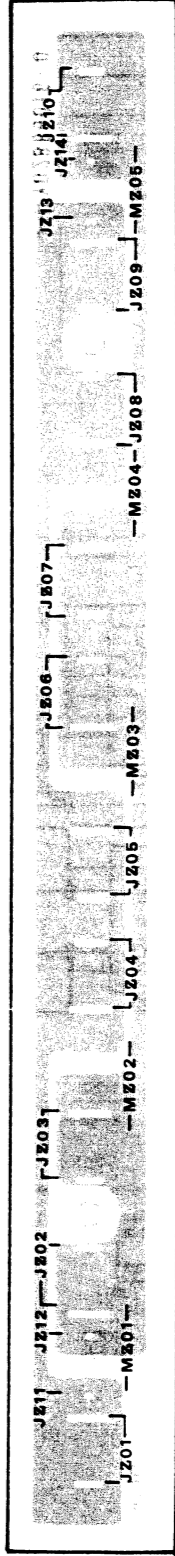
Dial Lamp Assembly (PZ01) Component Location
